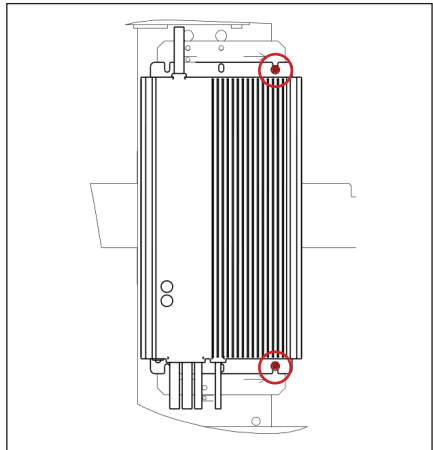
MEAN WELL®, Enedo®, or SL Mounting Screws
